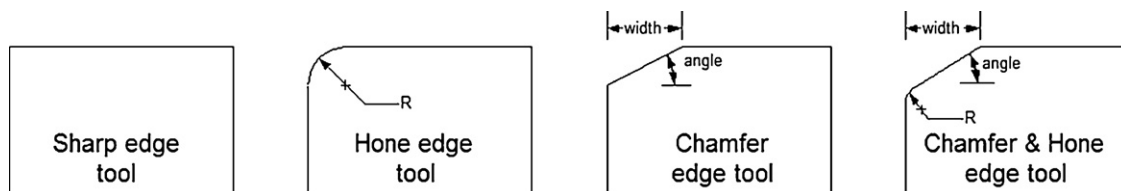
Type of edge preparations used in CBN and ceramic cutting tools in hard turning.
